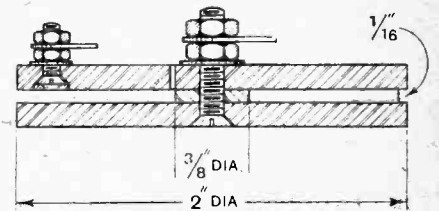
Ebonite bobbin former for the H.F. choke coil.
